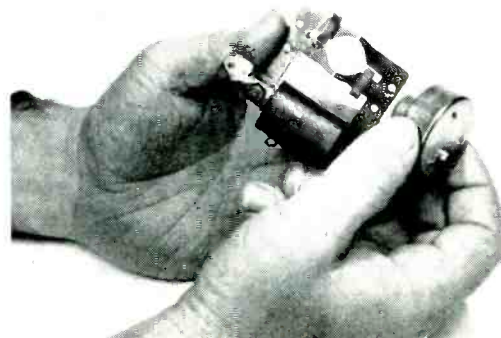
Disassembled the field and coil assembly is in the man's left hand, the rotor that runs the timer is in the right. Occasionally, the oil leaks out, or it wears and you have to replace it with a new one.
